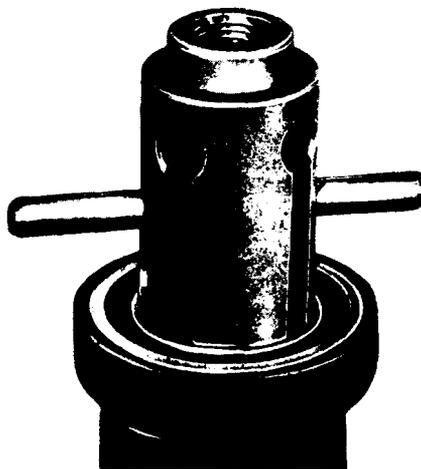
Press the inner part of the puller into the ball bearing and pull upwards by means of the cross pin
